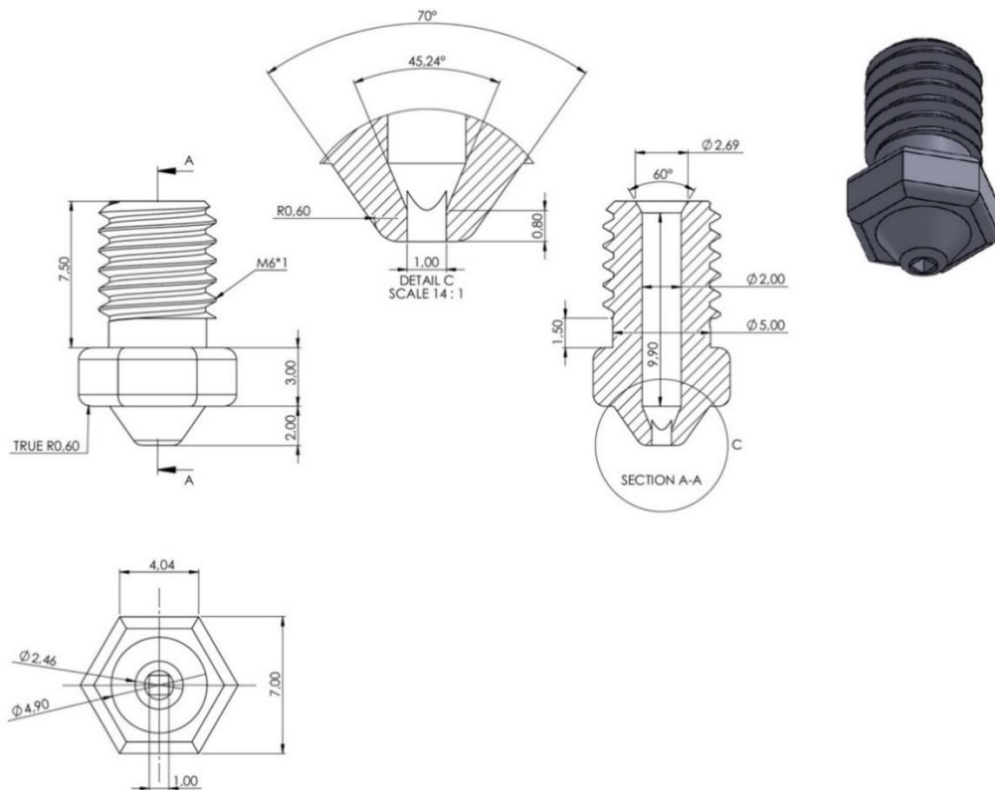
Technical drawing of 1x1mm square nozzle (designed by Diogo Vieira da Silva) (all dimensions in mm).
